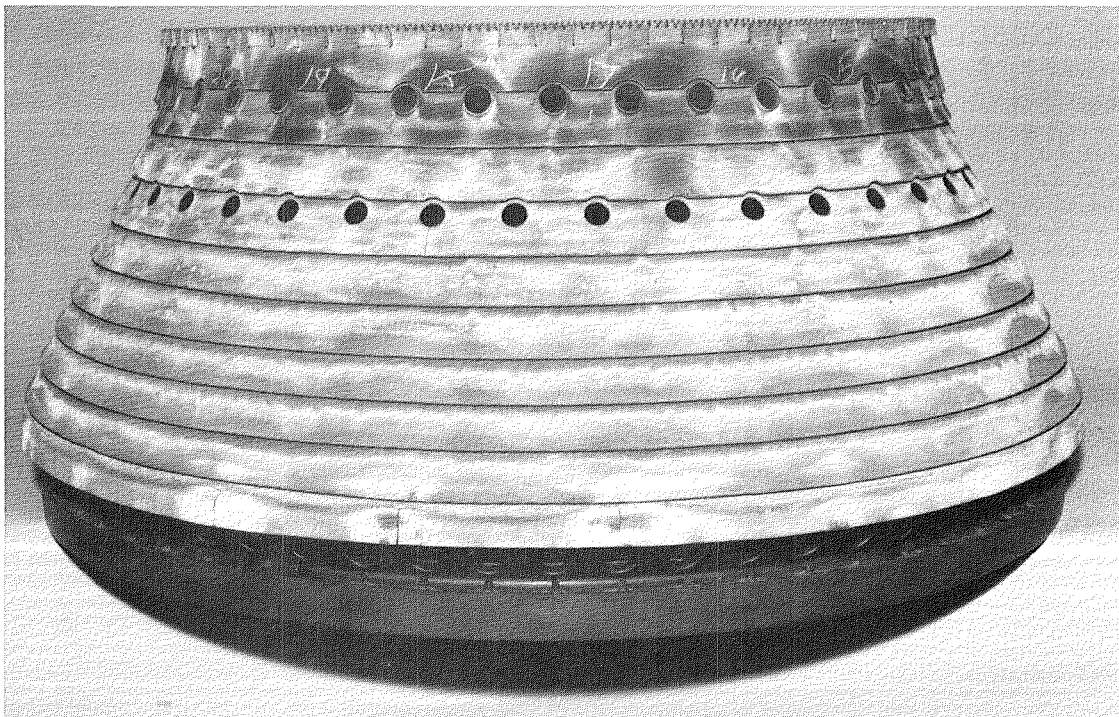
Aft End Circumferential and Axial Cracking on Medium Time, Medium Cycle Combustor Inner Liner.
